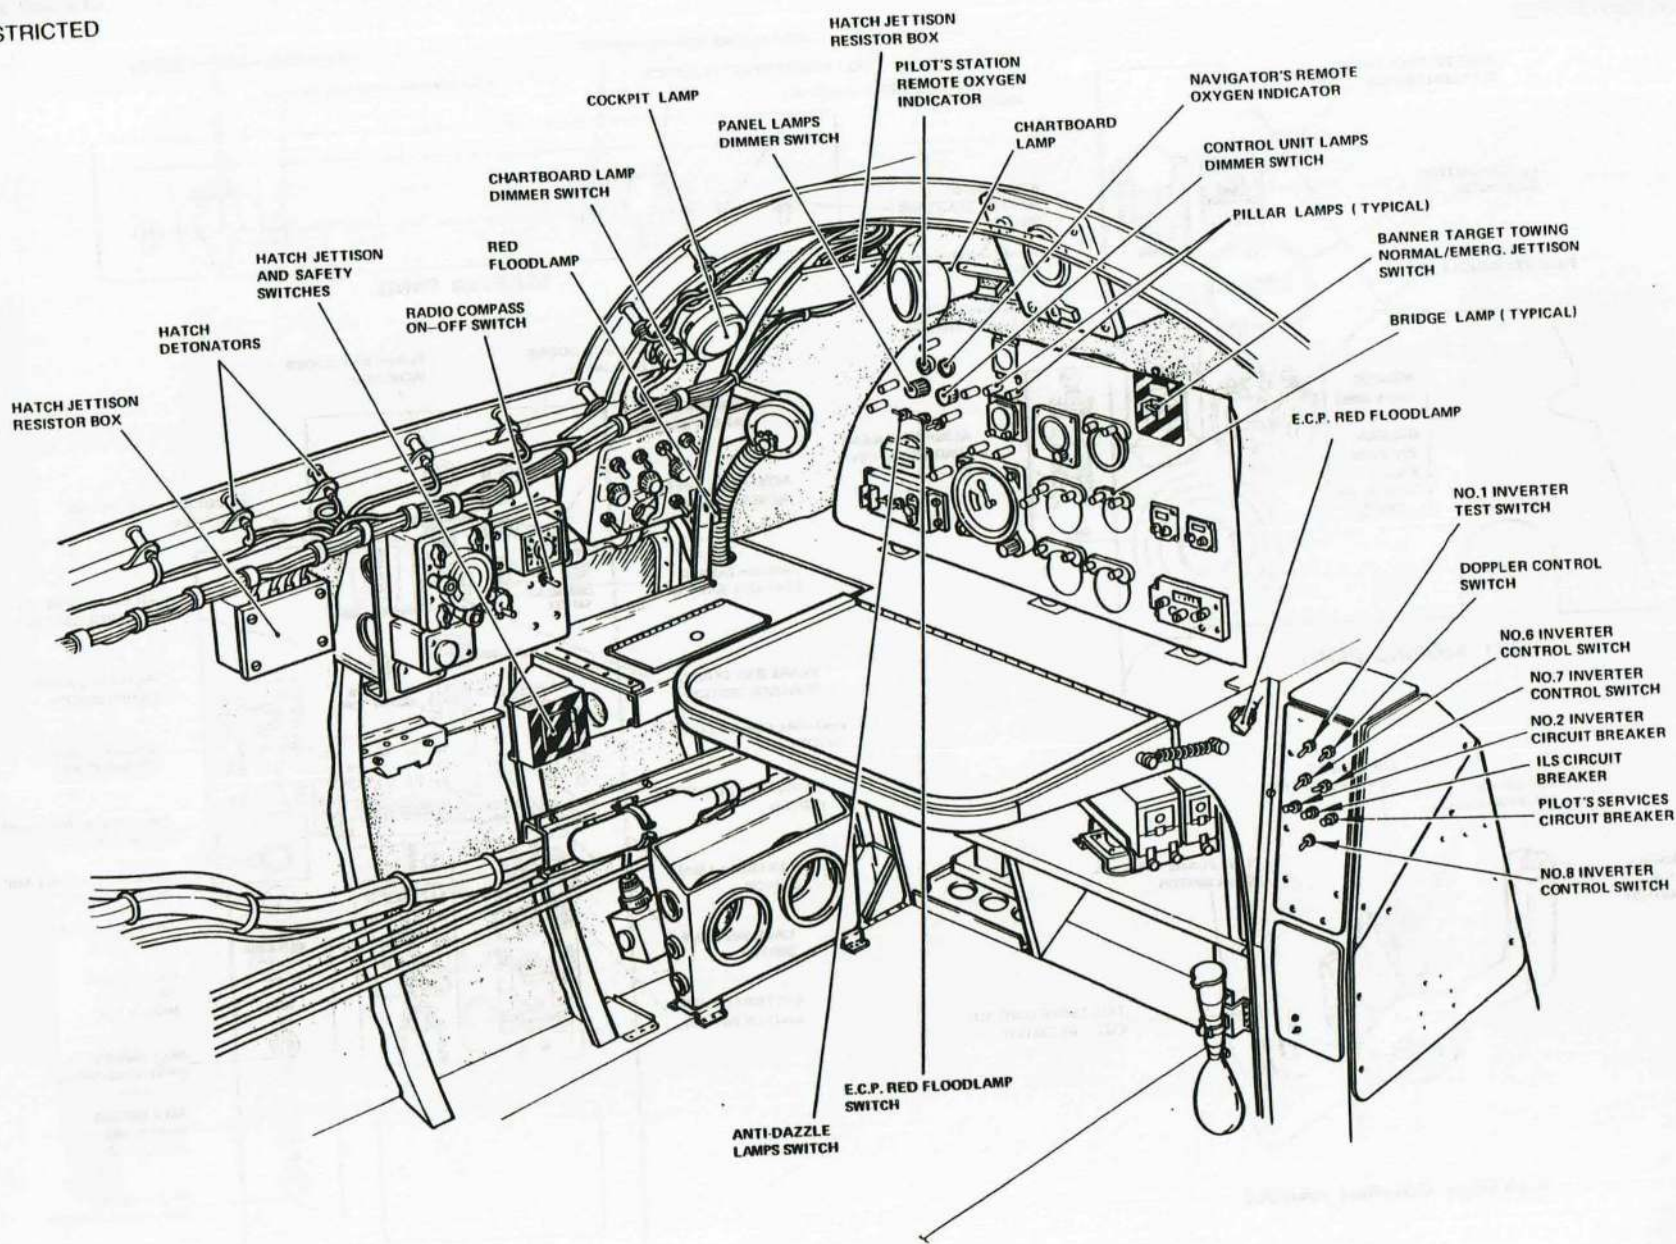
ELECTRICAL INSTALLATION - NAVIGATOR'S PORT STATION
